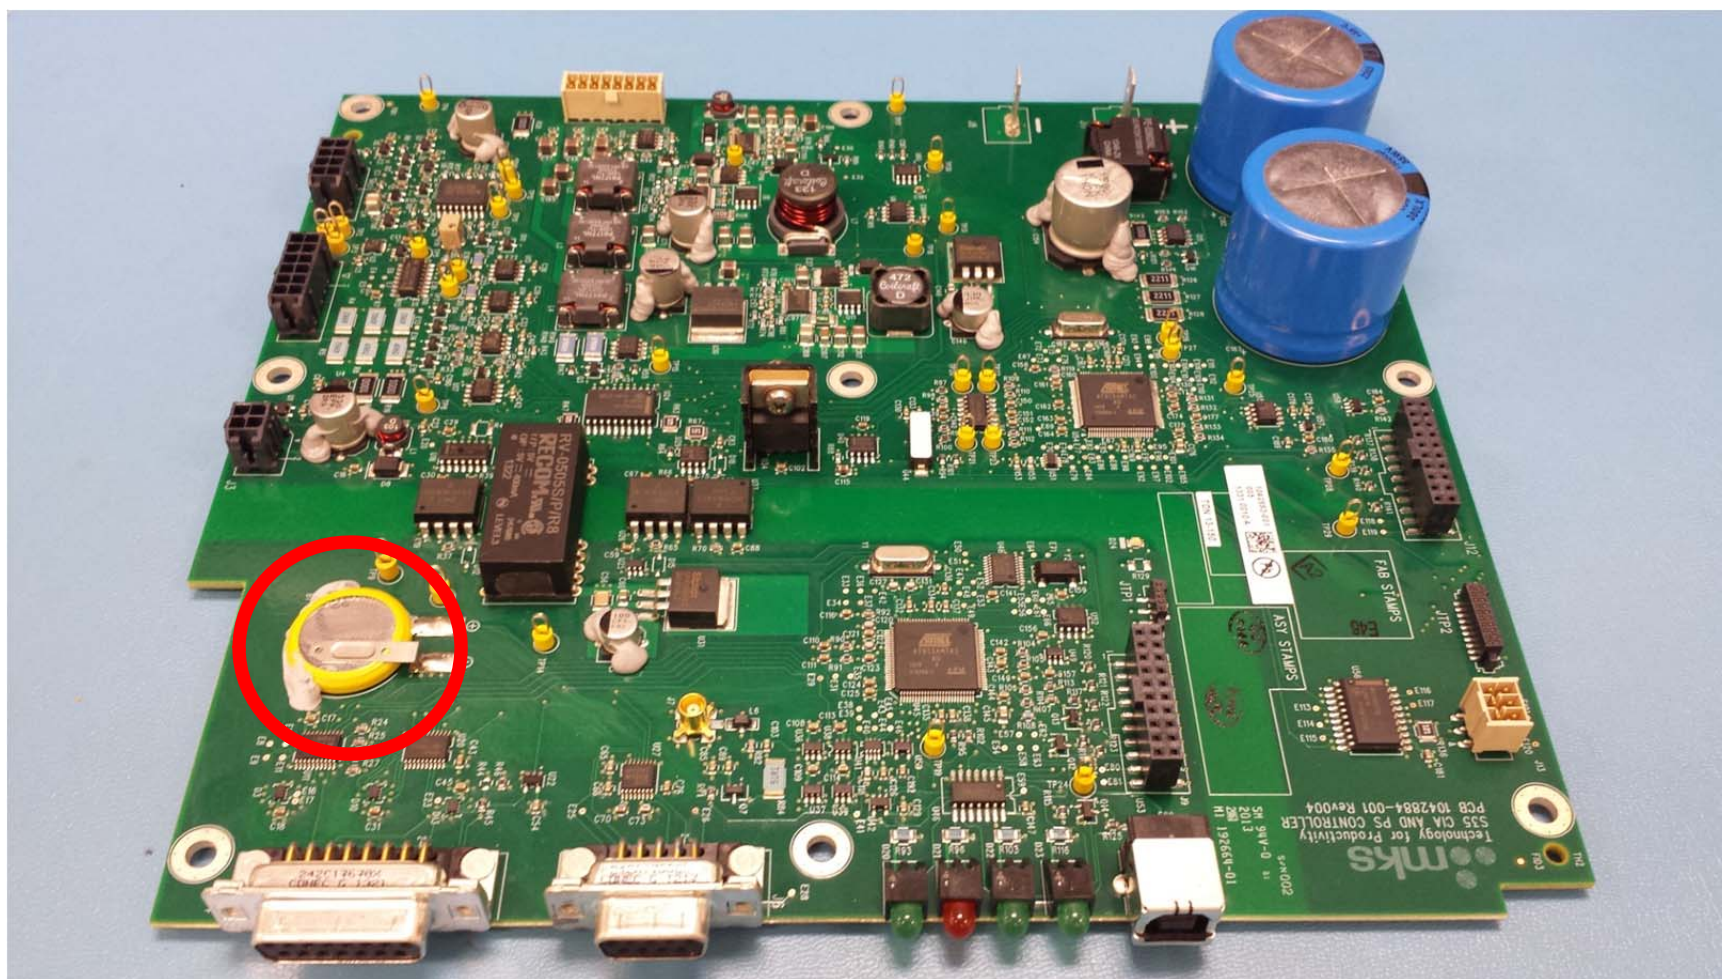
Customer Interface and Power Supply Controller Assembly (battery location circled)
